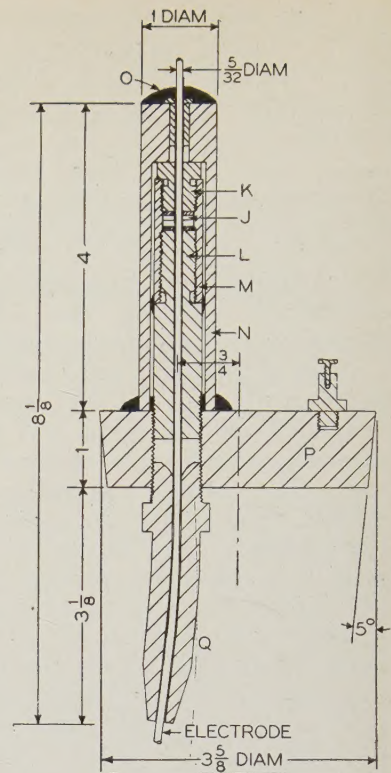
(above). Cross-sectional view of welding chamber
